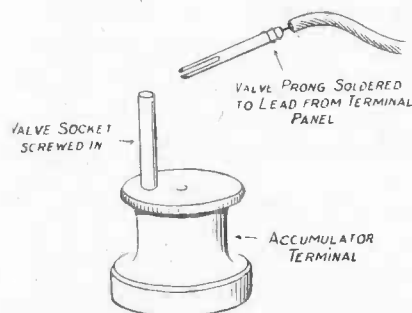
Detail of Accumulator Terminal with Valve-socket Connector.
